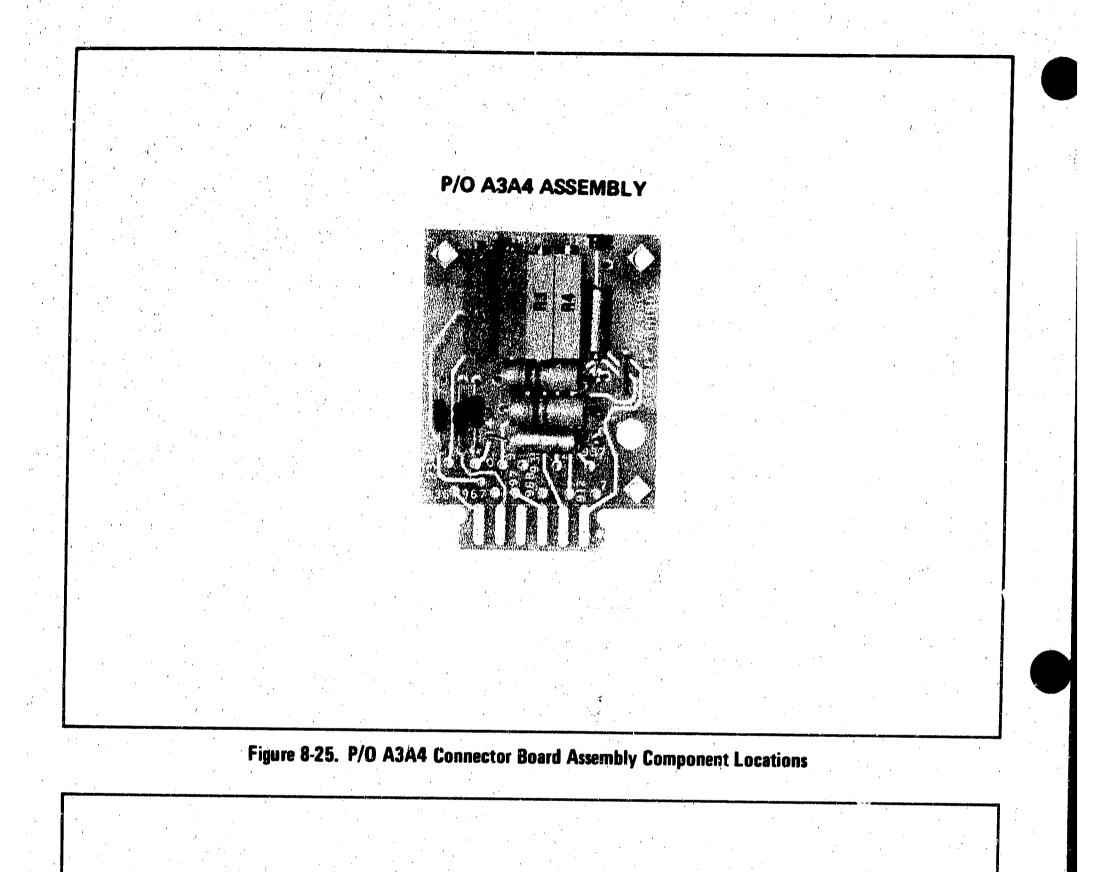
P/O A3A4 Connector Board Assembly Component Locations
